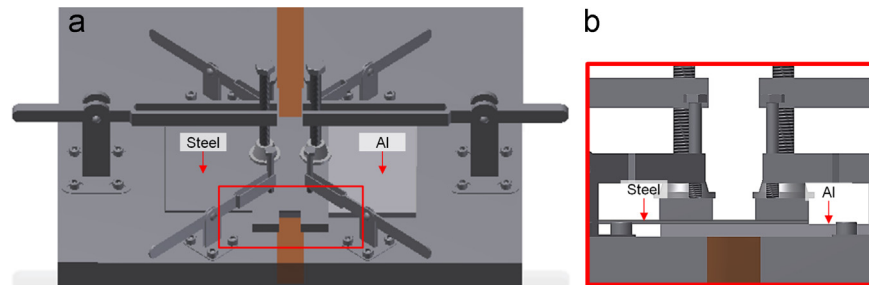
Clamping system used in laser welding-brazing with the lap joint configuration: (a) General view, (b) detailed view
